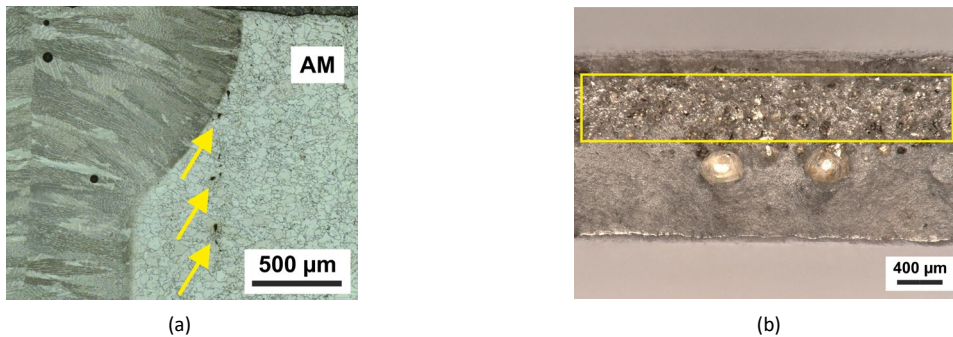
(a) Coupon of the two welded specimens corresponding to *welded pair I* AM-AM 0° in SR+TSA condition. The yellow arrows point out the defective AM layer with a Lack-of-Fusion porosity. (b) View of the fracture surface of one of the tensile samples located at the same plane where this imperfection (marked within the yellow rectangle) was identified.
